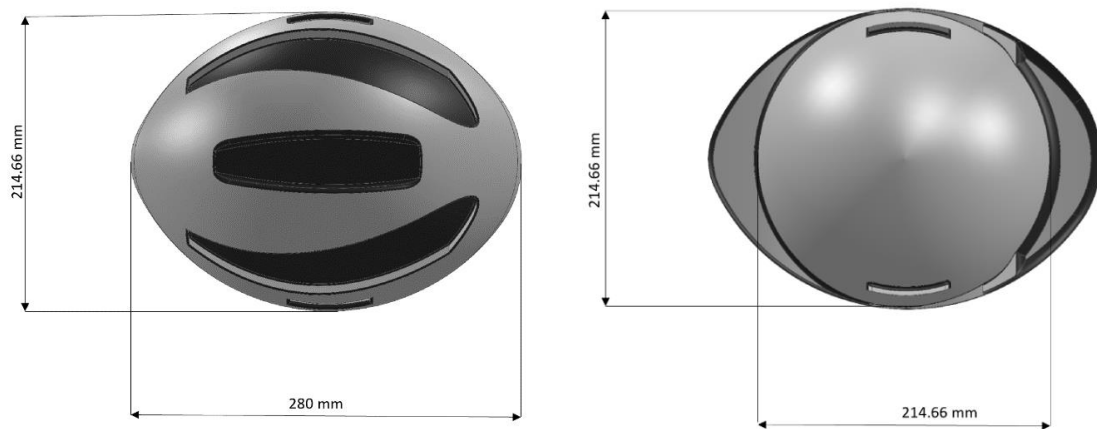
(a): Top view of the helmet. (b) Bottom up view of the helmet
